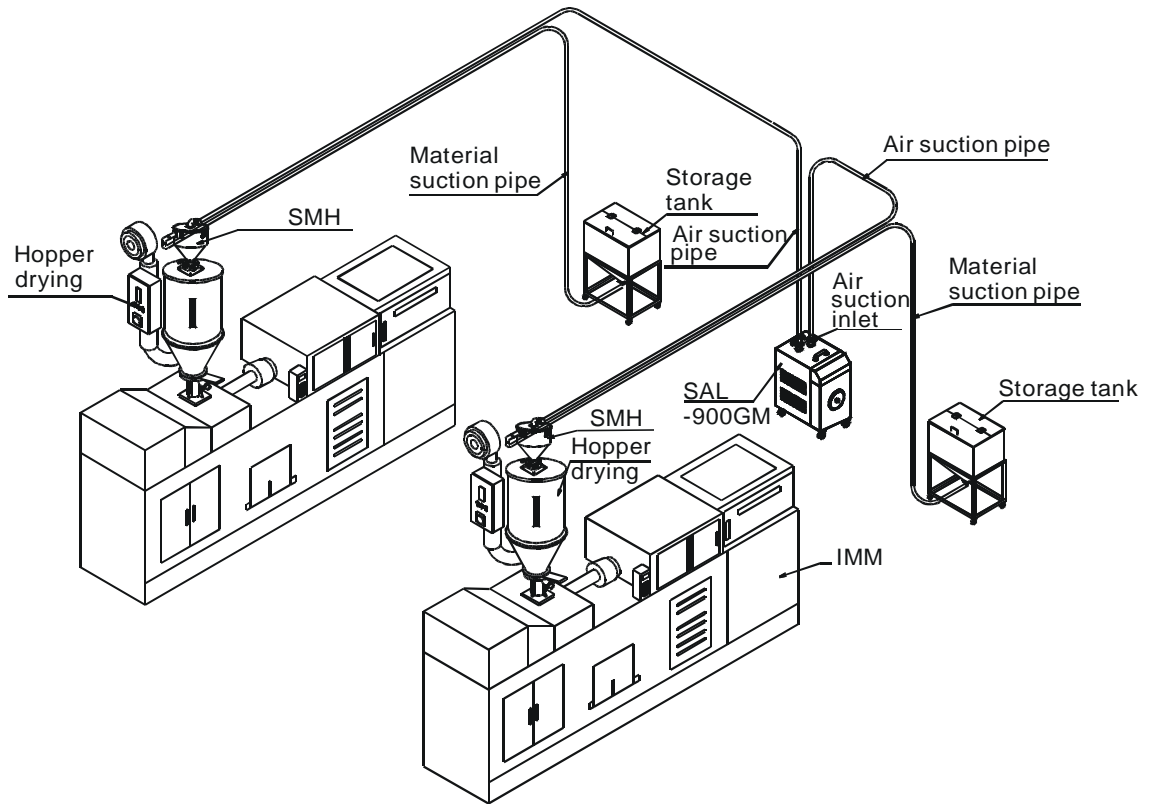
installation layout 2 (SAL-900G/900G2)
